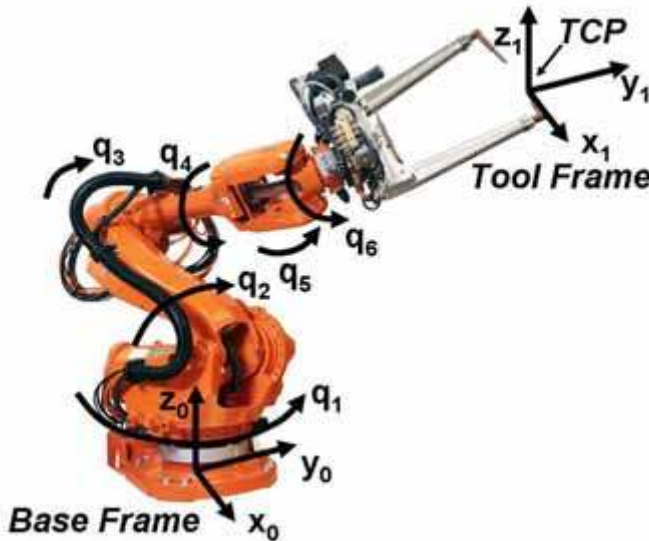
Base frame, tool frame, and joint positions illustrated on a robot equipped with a spotwelding gun.
